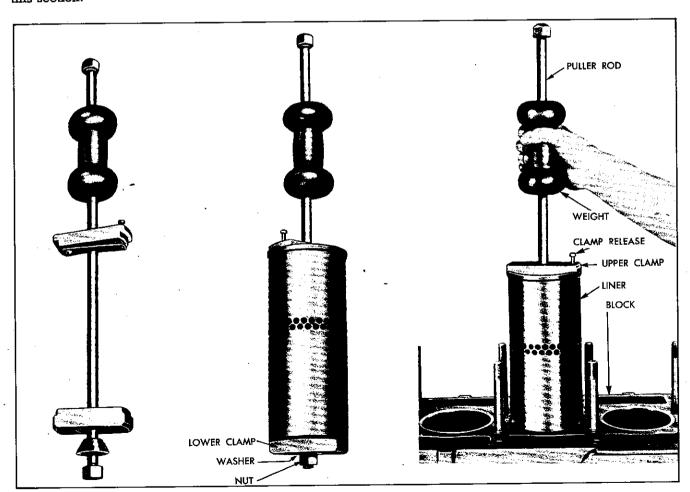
Removing Cylinder Liner with Tool J-1918.
